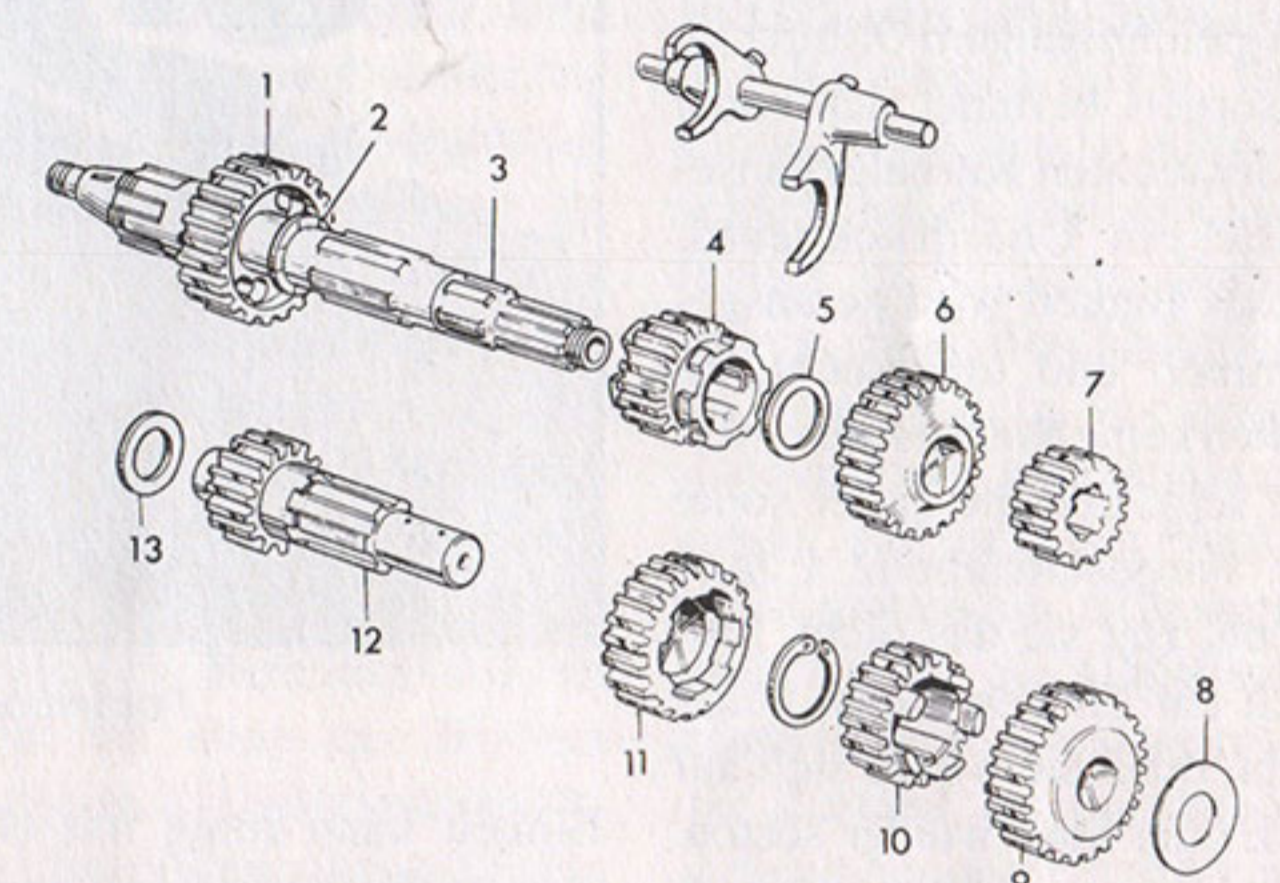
EXPLODED VIEW OF GEAR CLUSTER FITTED TO ALL LATER MODELS
